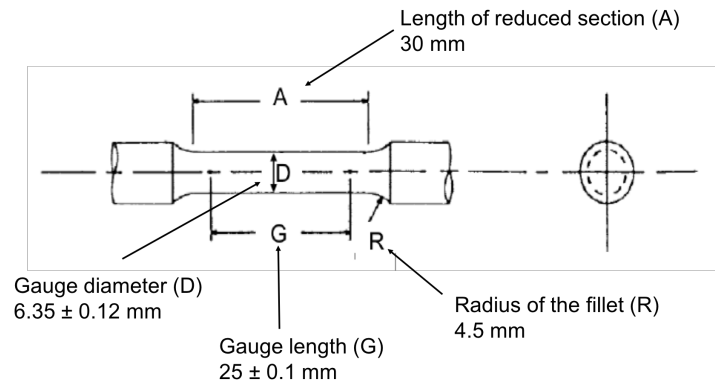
Dimensions of the ASTM E8M tensile specimen.
